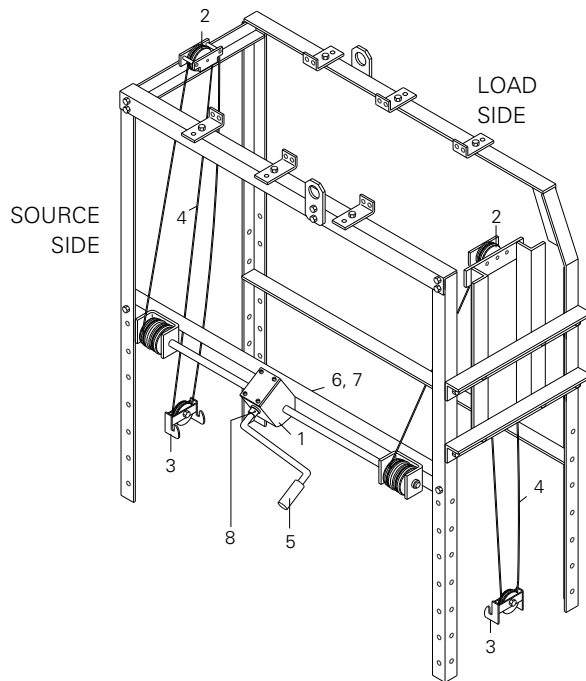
Installing Tank-Lifting Windlass KA89WV2 to tophalf substation frame.
